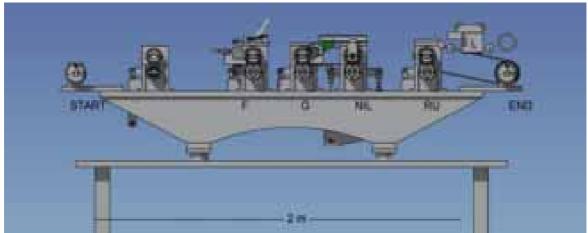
Schematic layout of printing tool for roll to roll manufacturing .
